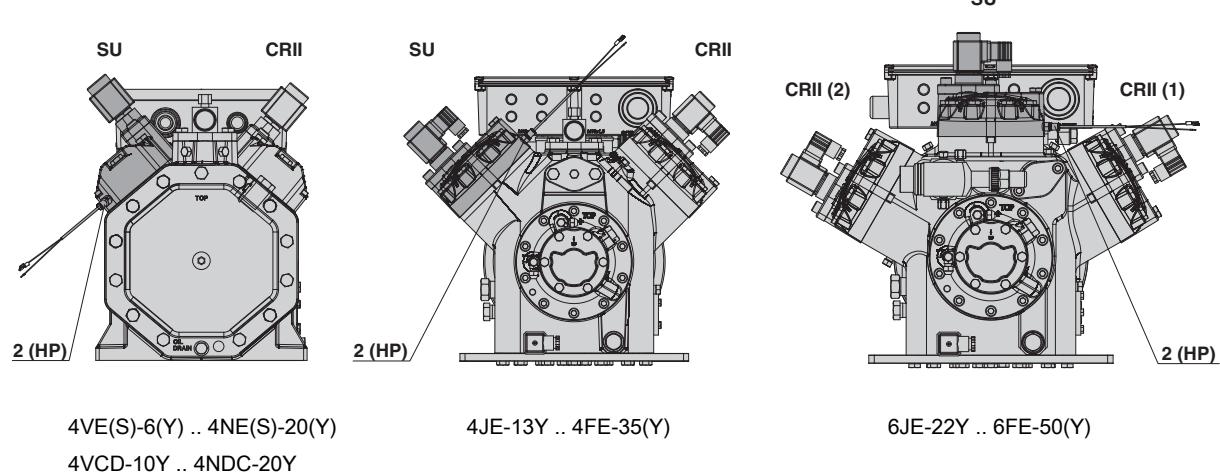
Position of the cylinder heads and valve top parts for start unloading in case of factory mounting
